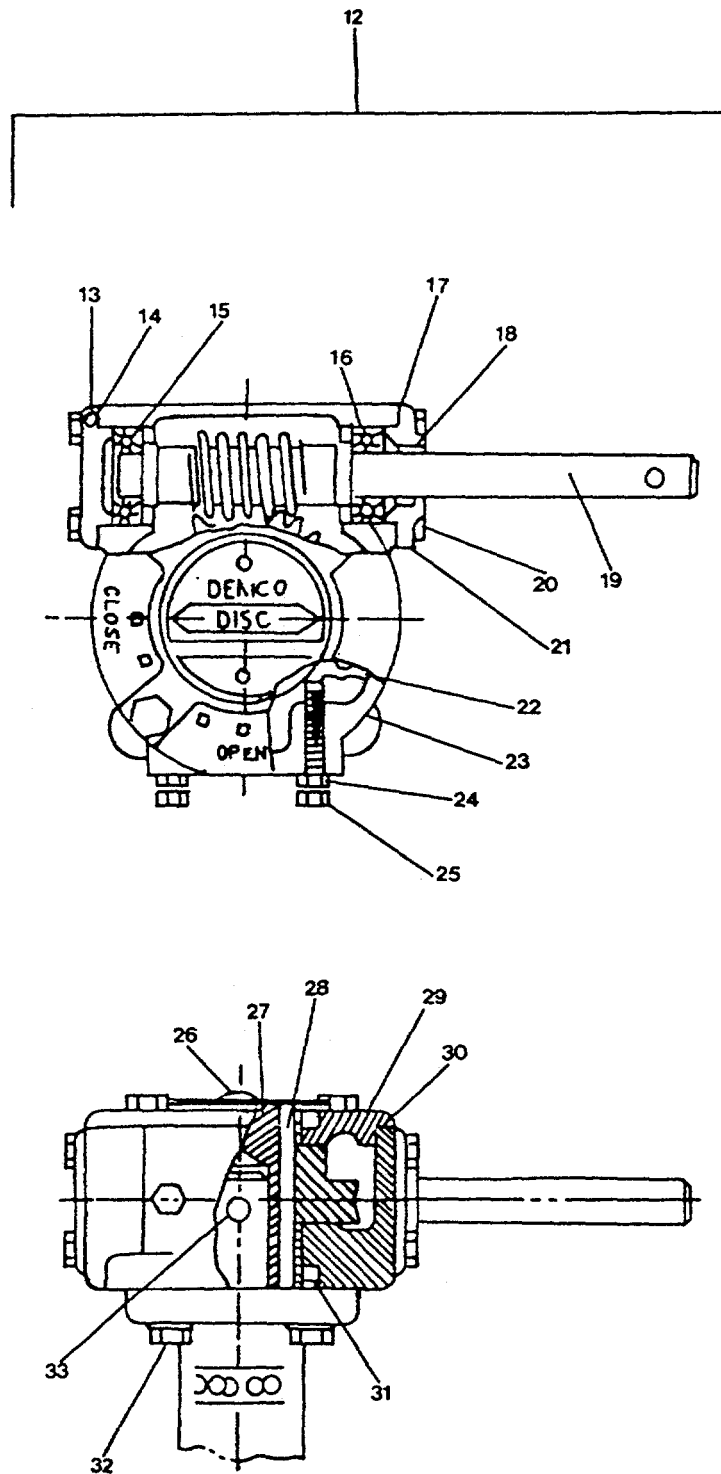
VALVE, BUTTERFLY, GEAR OPERATED
